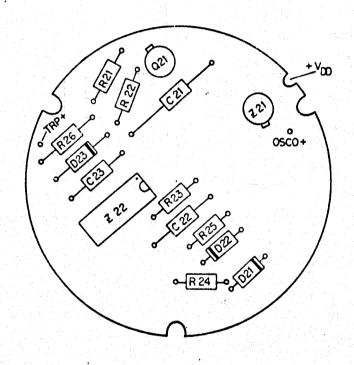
The fail-safe printed circuit board of the Utah Pulse-to-Pulse Rocketsonde.
